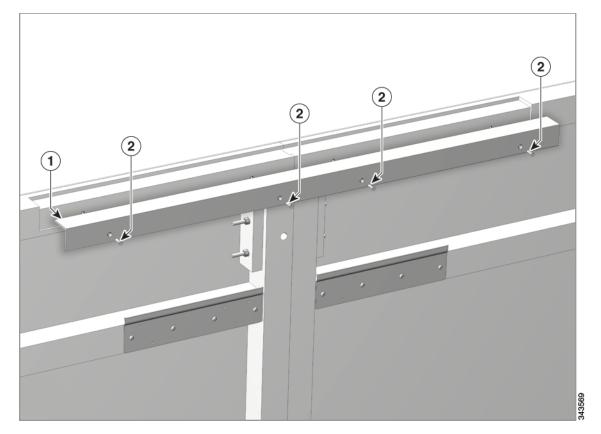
Installing the Upper L Brackets Into the Wall Panels (2 of 2)
